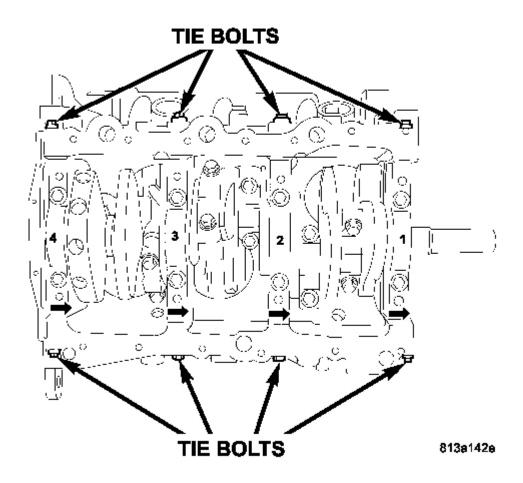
Main Bearing Cap Identification Courtesy of CHRYSLER LLC
